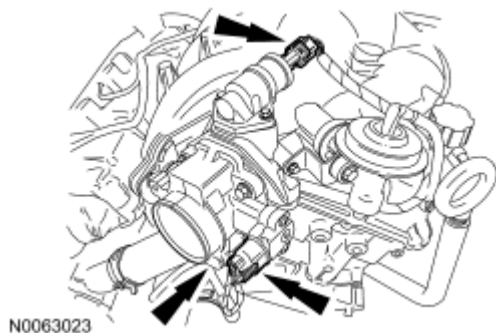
Identifying (IAC) Valve, (TP) Connector And Retainer
